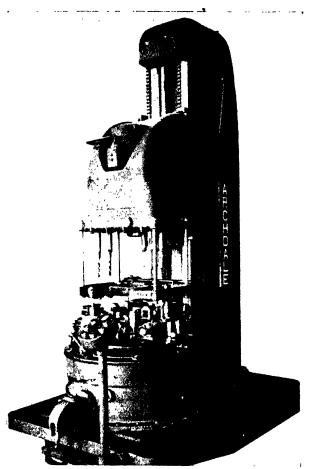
Fixed-centre multi-spindle drilling machine, with hydraulic feed (*J. Archdale & Co., Ltd.*)
